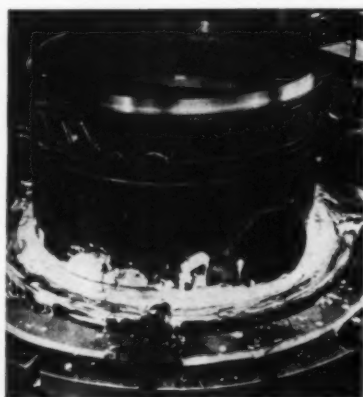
Jet-engine part made of welded titanium components.
